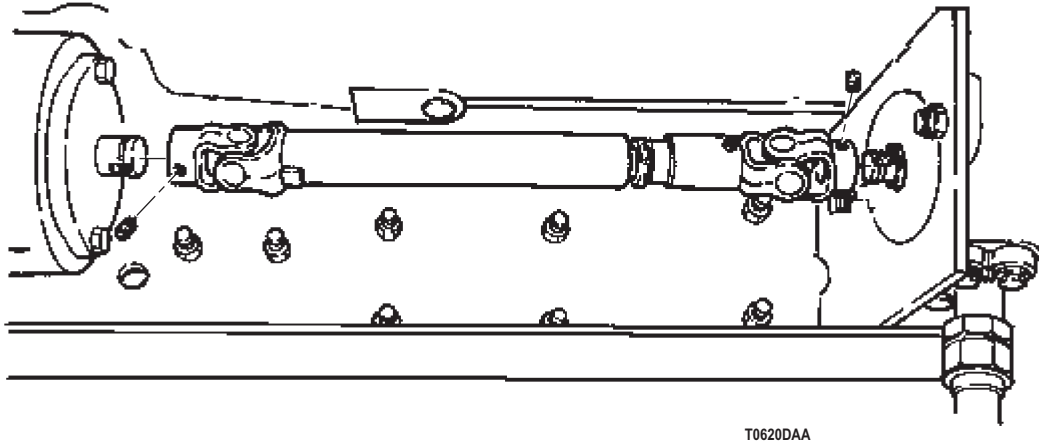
Transmission PTO to Hydraulic Pump Propeller Shaft.
